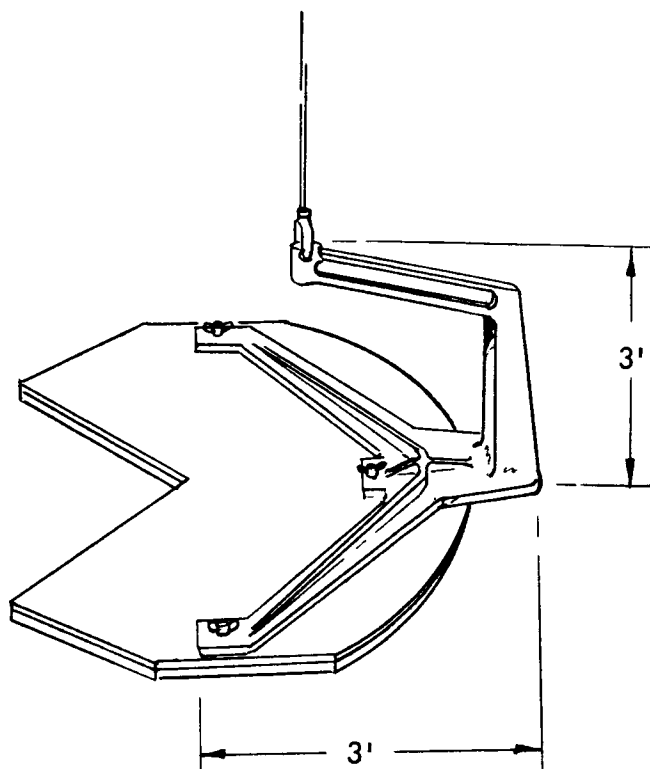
Solar Array Mounting Fixture, MOSE 119
